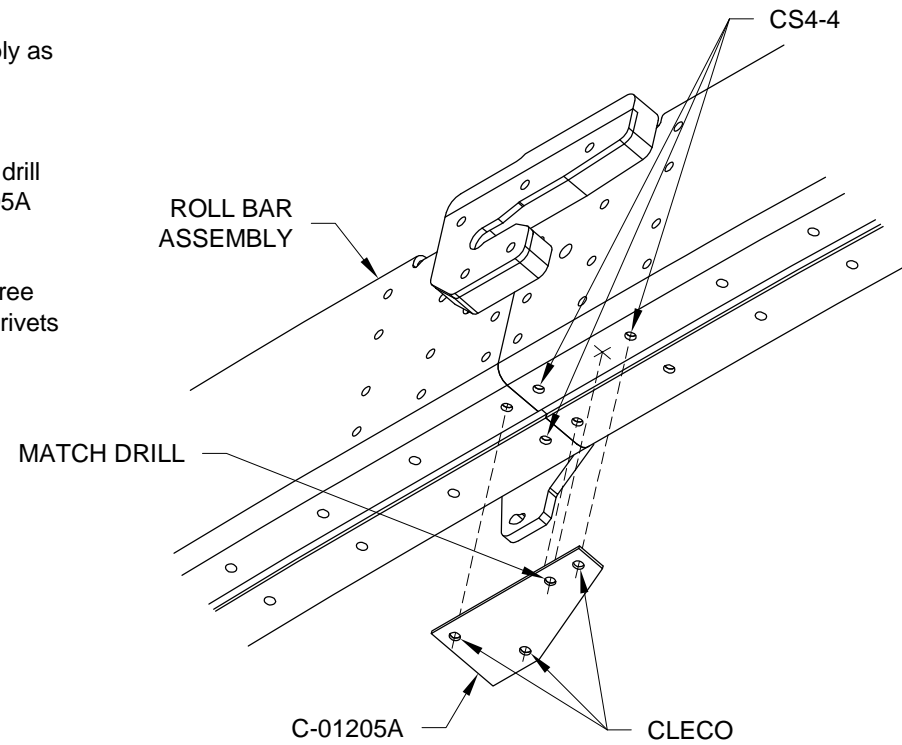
DRILLING FOR THE CANOPY LATCH BLOCK
